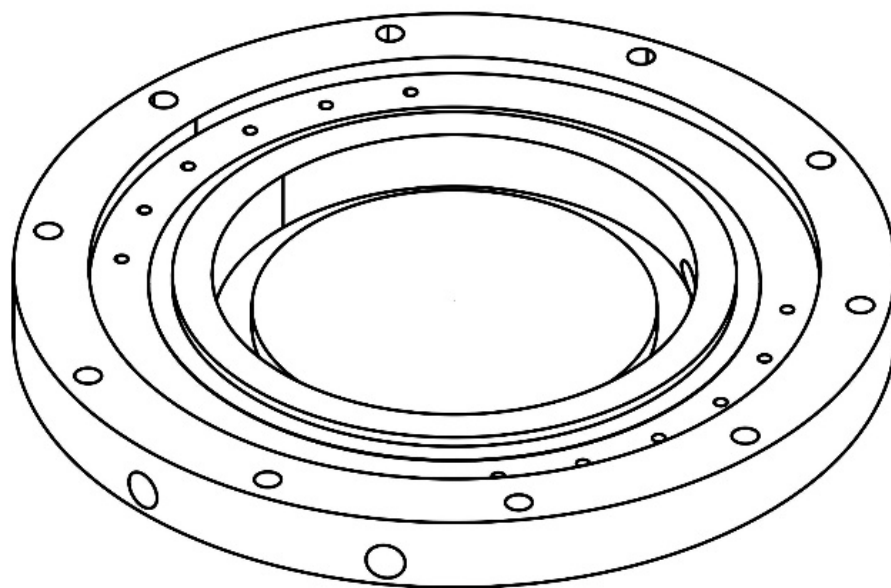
Technical drawing of the bottom part of the biofilm module with an oblique front view.
